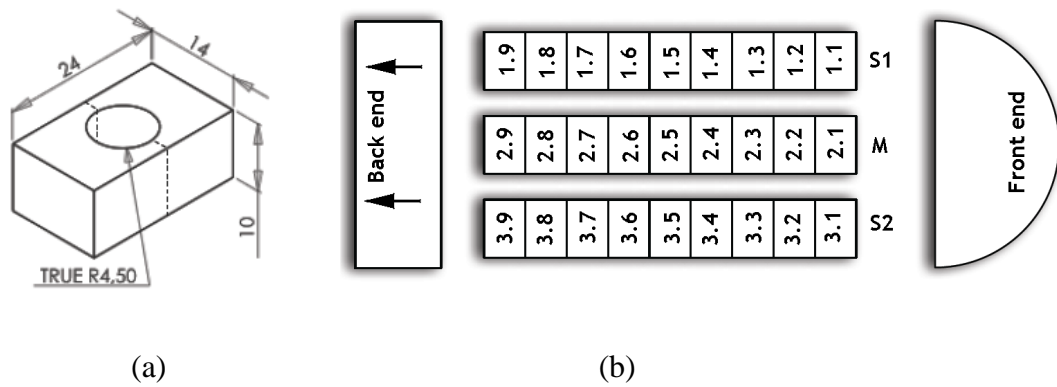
(a) Geometry of the new test specimen. (b) Location and numbering of specimens taken from the front end portion of the strip profile with an interior extrusion seam weld.
